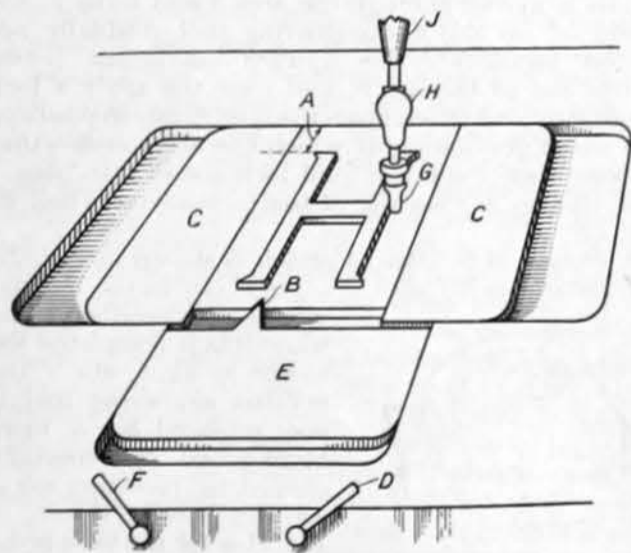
BASE OF PUNCH ENGRAVING MACHINE
